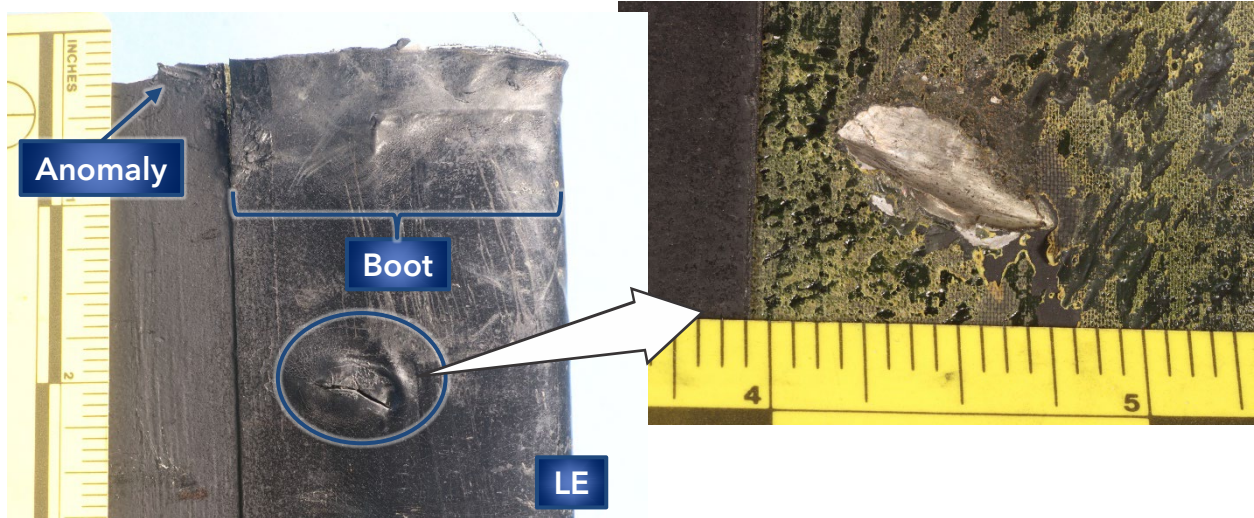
Fracture surface of the propeller blade piece as received.
